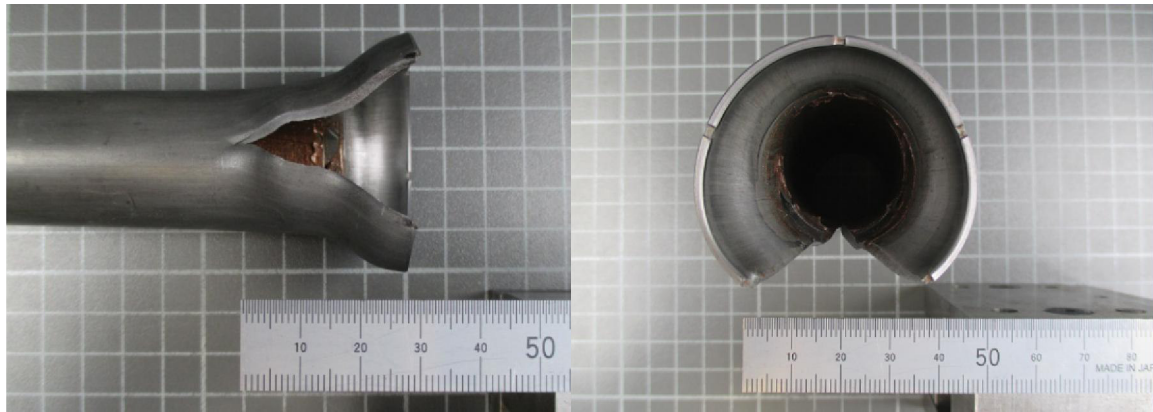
Failure caused by fast fracture on a hybrid R125A15D08 specimen
